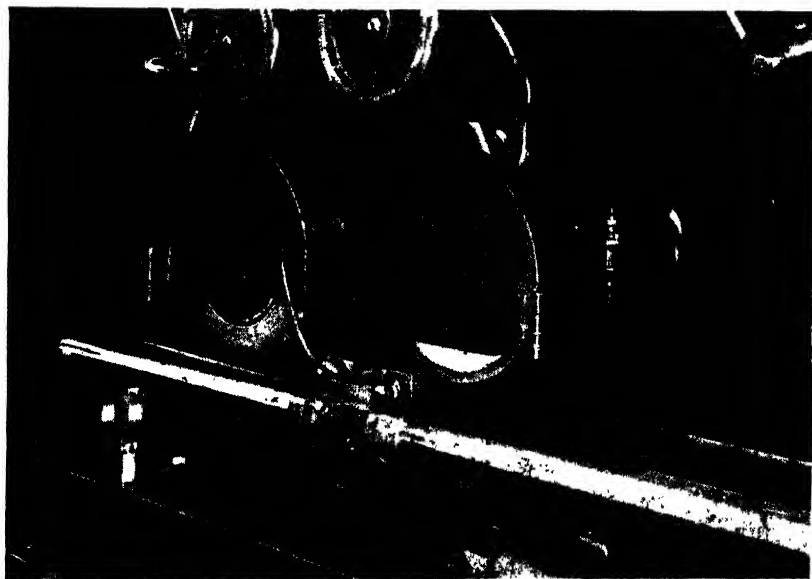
Straddle-Grinding Surfaces on Landing Gear Parts
